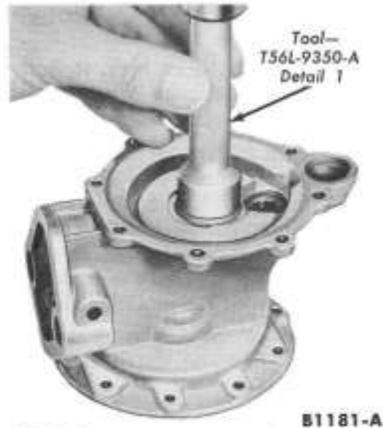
Diaphragm Rod Oil Seal and Retainer Installation
